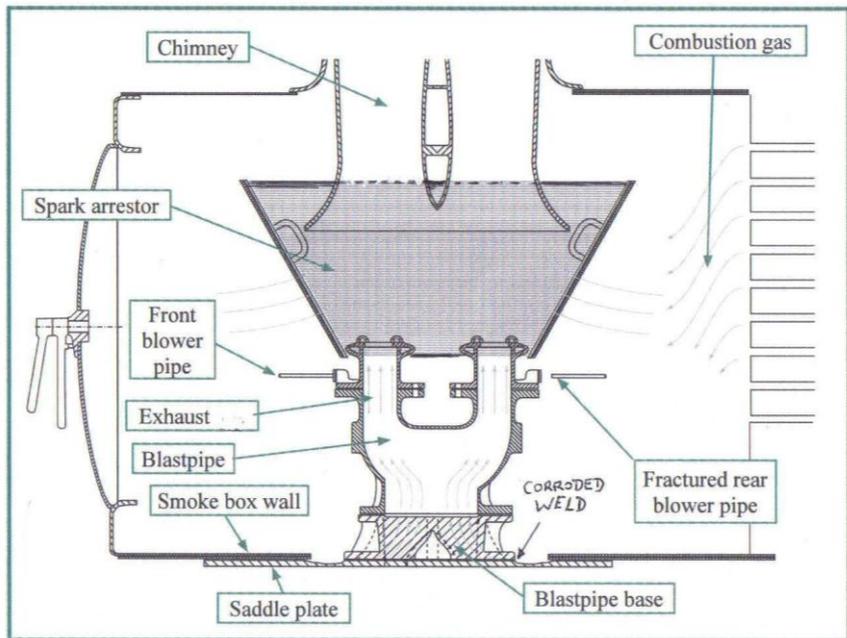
The blast pipe and base (Location of corroded weld)
